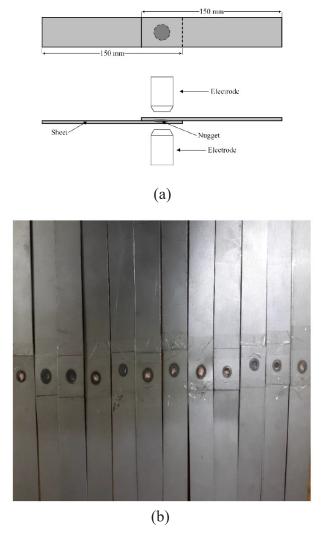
a) The configuration of joining by RSW b) The welded sample by RSW.
